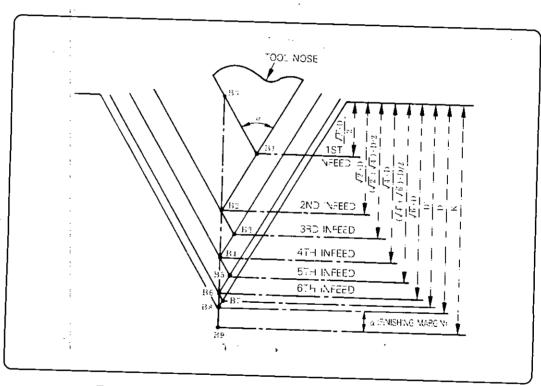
Constant Cutting Amount, Zig-zag Cutting
